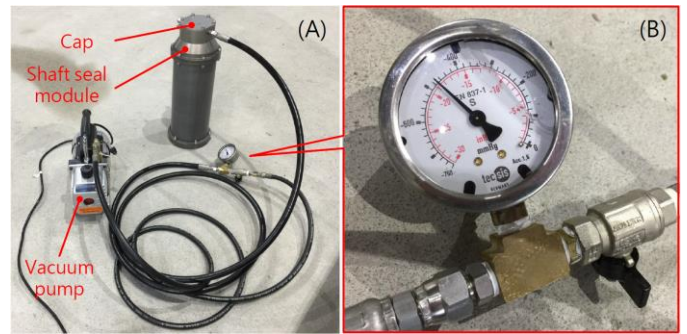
Sealing test of the shaft seal module. (A) Testing mechanism; (B) Reading from pressure gauge is -480 mmHg.
